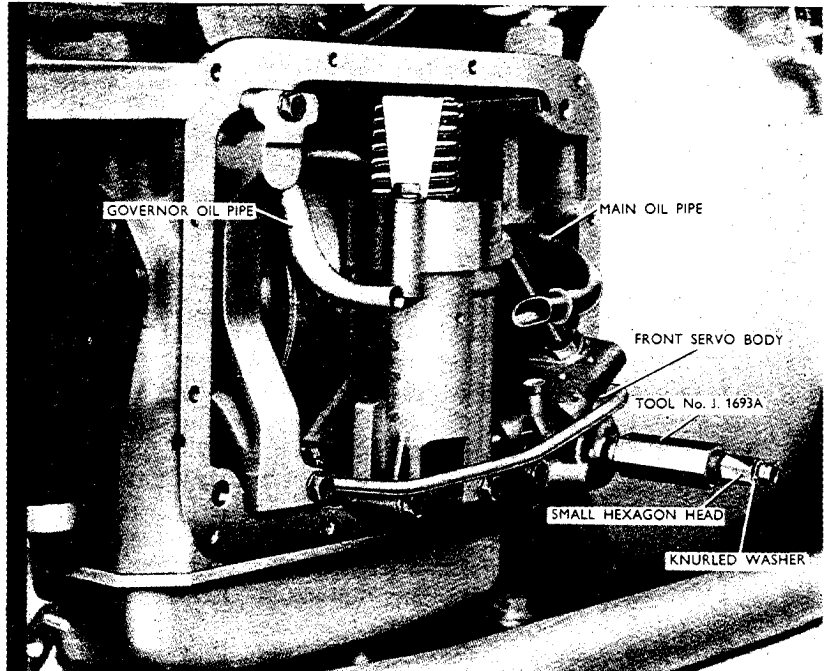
FRONT SERVO - GAUGE IN POSITION.
